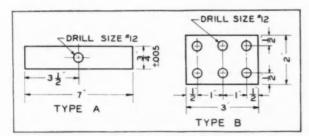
Test specimens for 3/16 in. dimple, 0.051 in material thickness.
